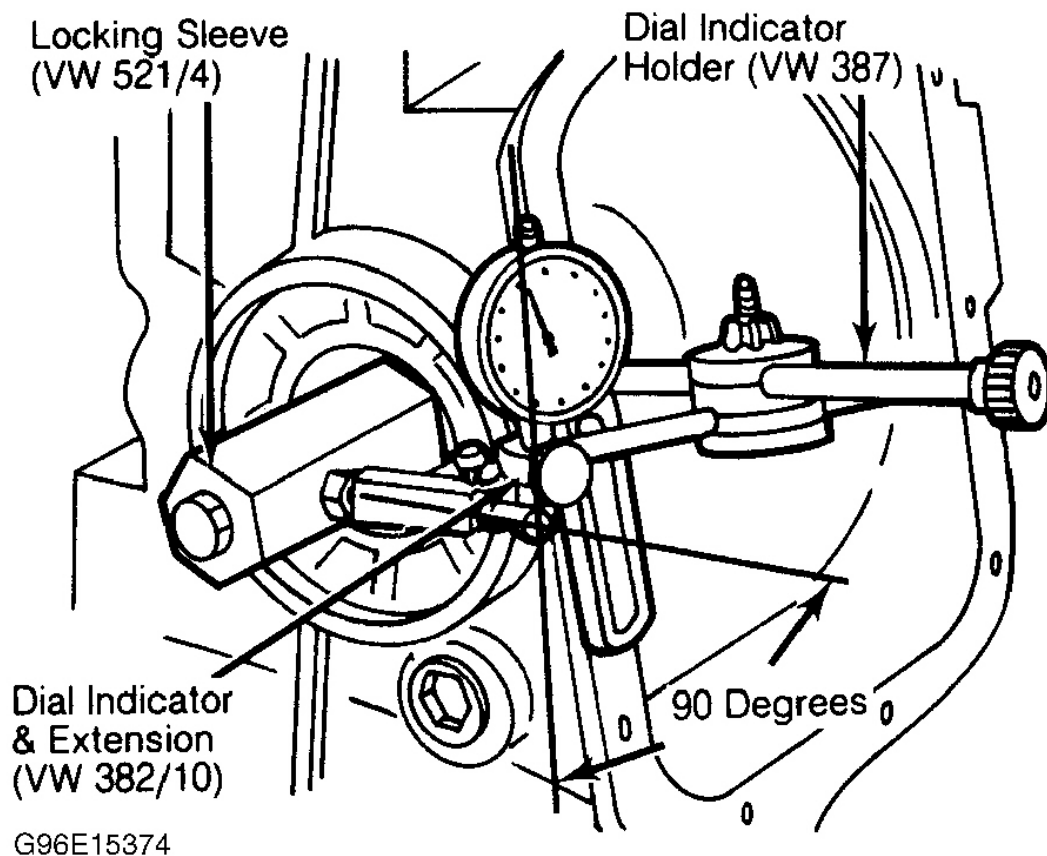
Installation Of Backlash Measuring Bar On Locking Sleeve
